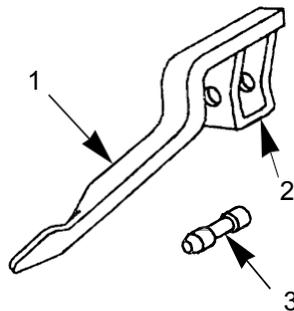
Inspection of Barrel Locking Lever and Grooved Headless Pin.
